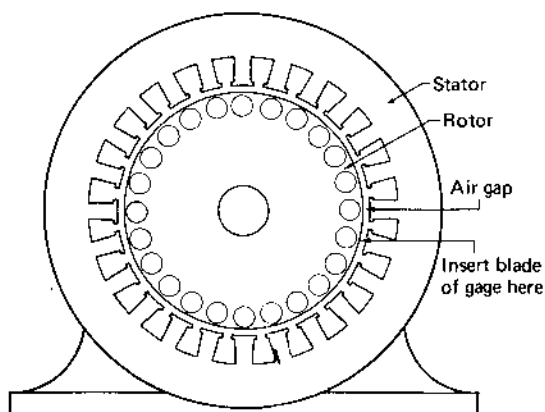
The air gap should be the same around the entire motor. This is checked with a feeler gauge.
